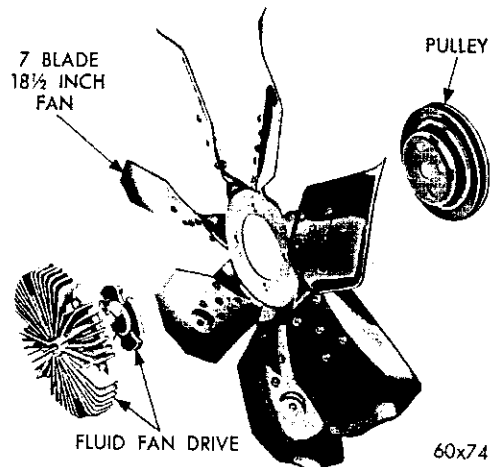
Silent Flite Fan Drive (Air Conditioning) and C-300H) Disassembled View
